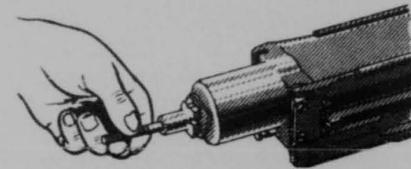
Inserting Driving Spring Guide Assembling Tool.
